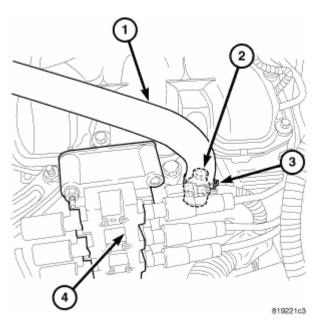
PCV Valve Location 3.8L Courtesy of CHRYSLER LLC
